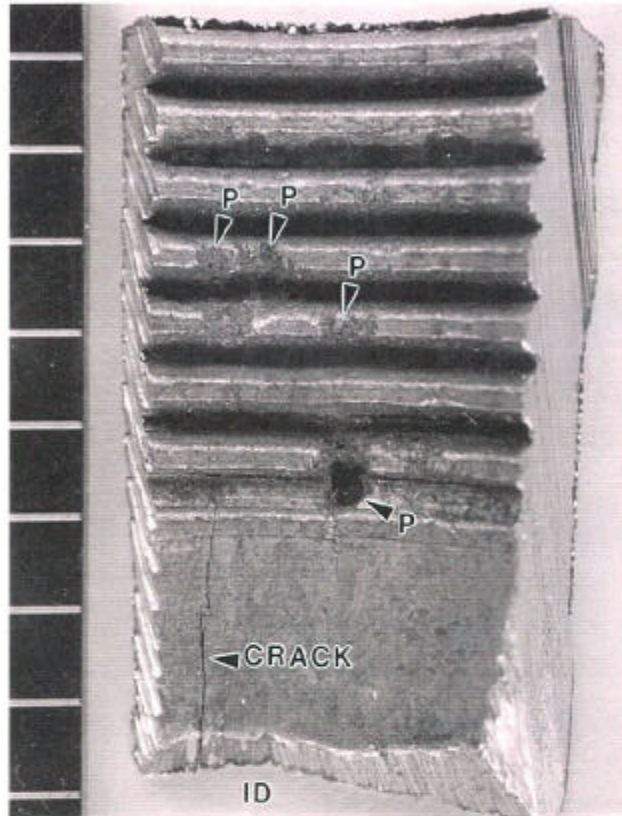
Close-up of portion of the inlet hole threads showing cracking and corrosion pits. Example pits are labeled "P". Scale is in 0.05 inch increments. Section 2A-1C was taken just behind this slice. Note that one pit forms a well-developed hole through this slice. Photo ID#: DC18129-TRS-1-8/5/98.
